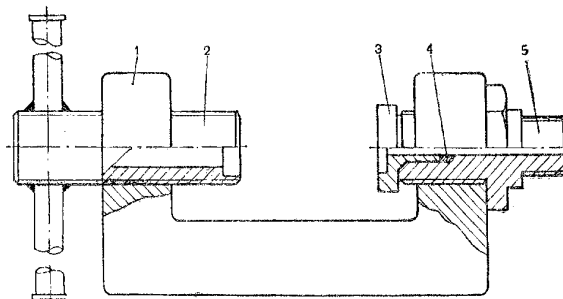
Adaptations for adjustment of valves of automation of spools of distributors P75-B3A on the device KI -562: 1 - a bracket; 2 clamping screw; 3 - adapter; 4 - ring sealant; 5 – fitting.
